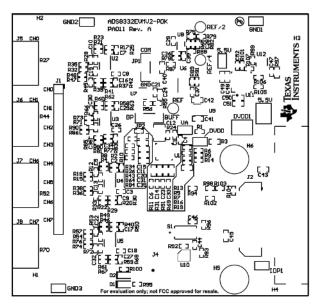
ADS8332EVMV2 PCB: Top Overlay
